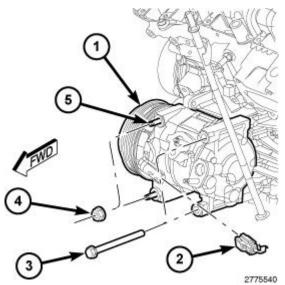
A/C Compressor & Fasteners Courtesy of CHRYSLER GROUP, LLC
